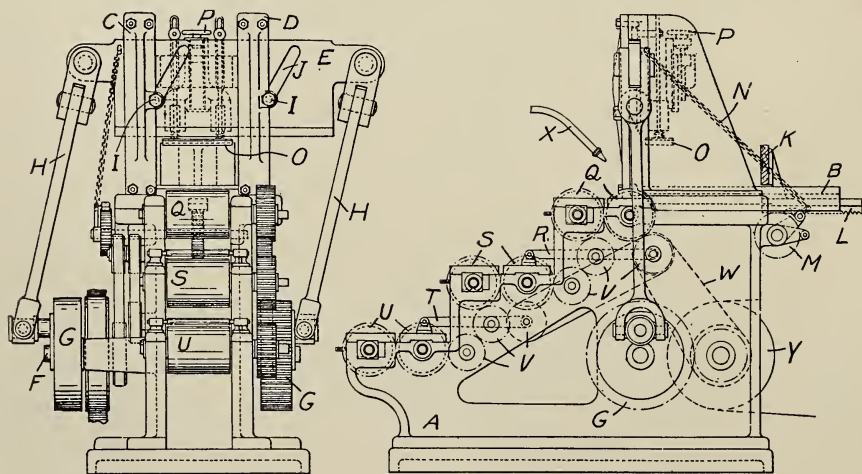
THE DONNELLY SLICING AND WASHING MACHINE.
